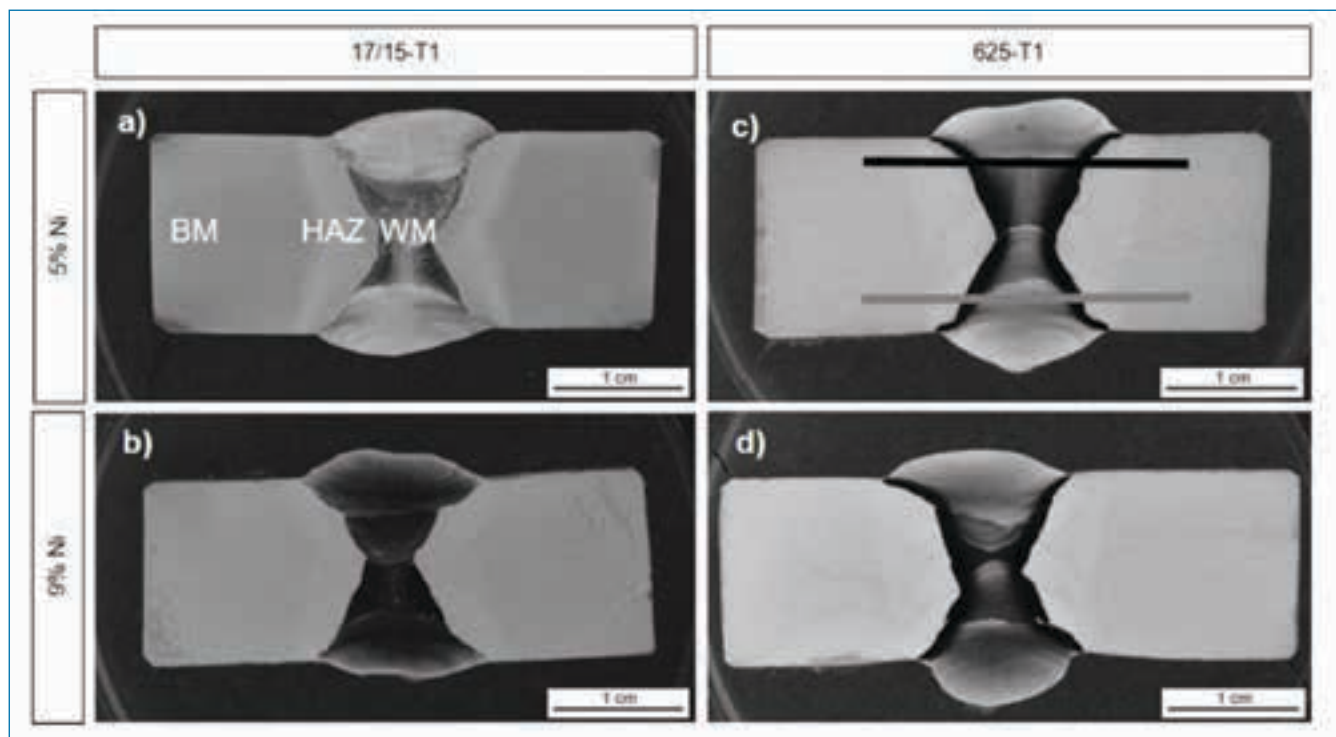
Macroscopic examination of welded joints: a) 5%Ni+17/15-T1; b) 9%Ni+17/15-T1; c) 5% Ni+625-T1; d) 9% Ni+625-T1.
